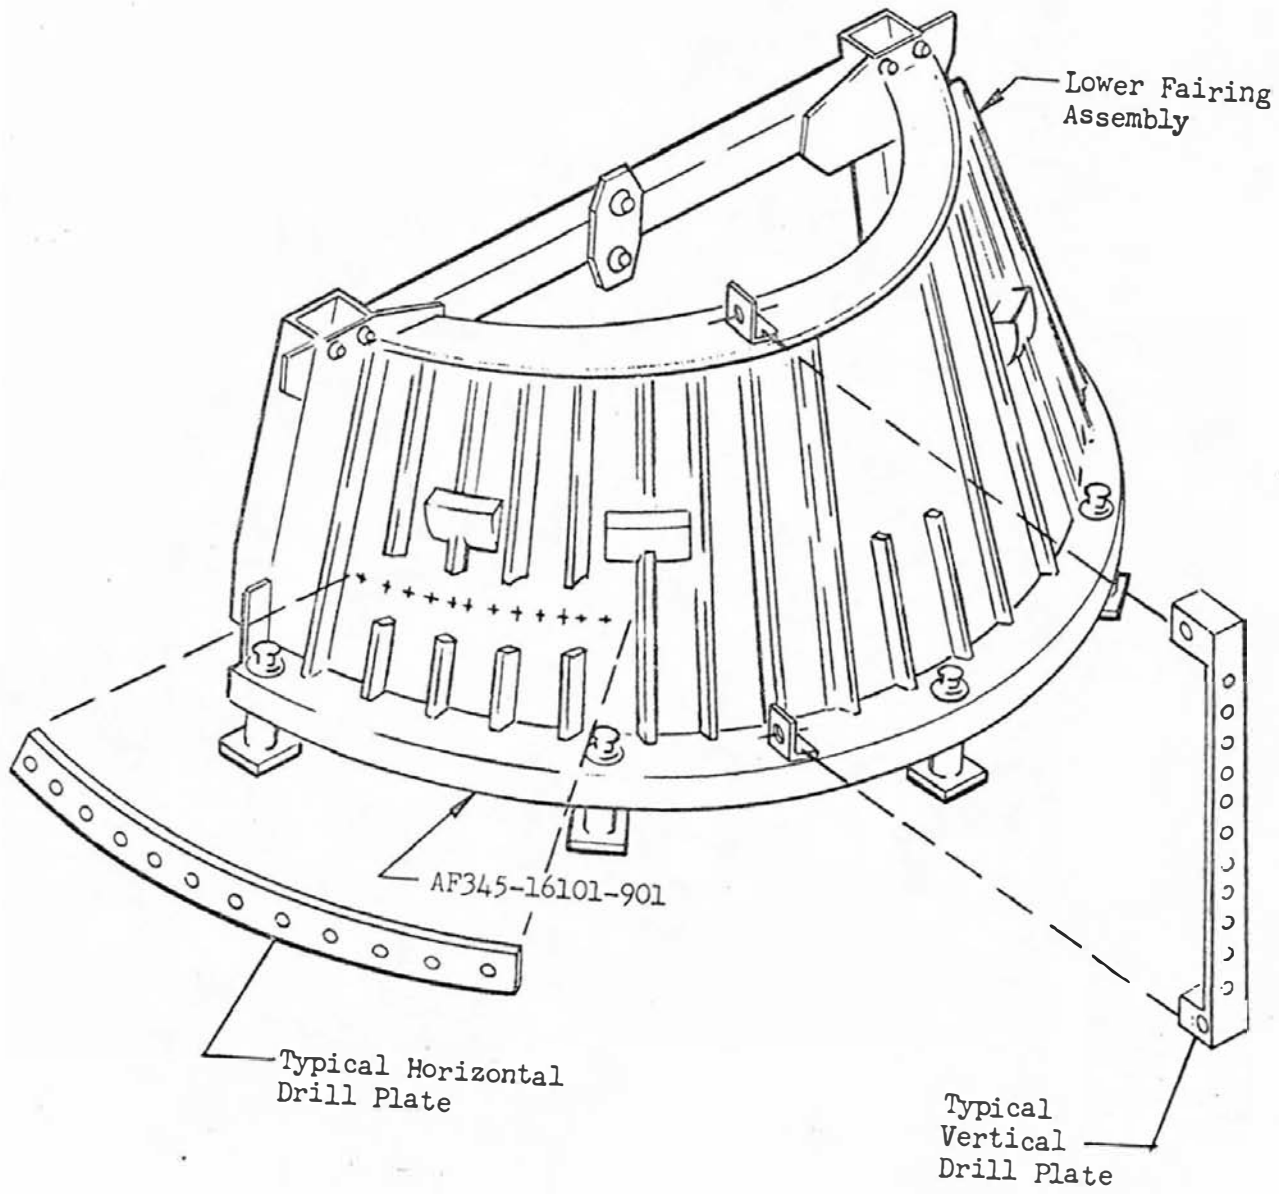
14. Assembly Fixture for Lower Fairing Assembly
